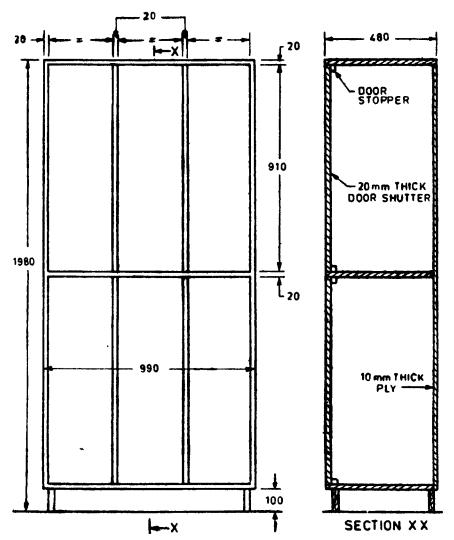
Cross and Long Sections Showing Construction and Assembly
